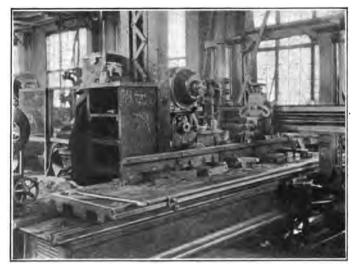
Method of planing edges of shoes and wedges without special fixtures.
